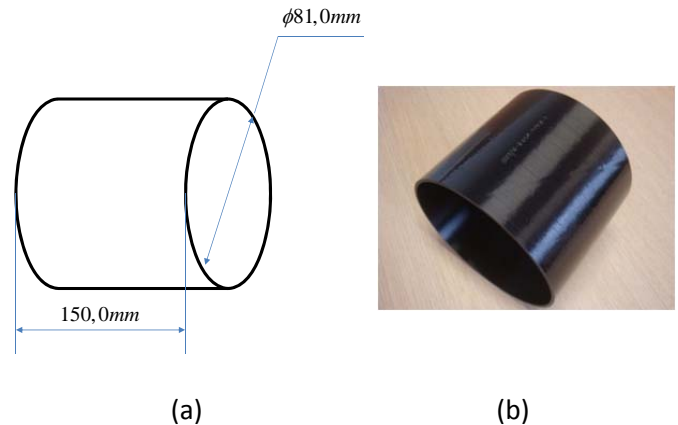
(a) Coupon dimensions; (b) Cylinder manufactured by filament winding process
